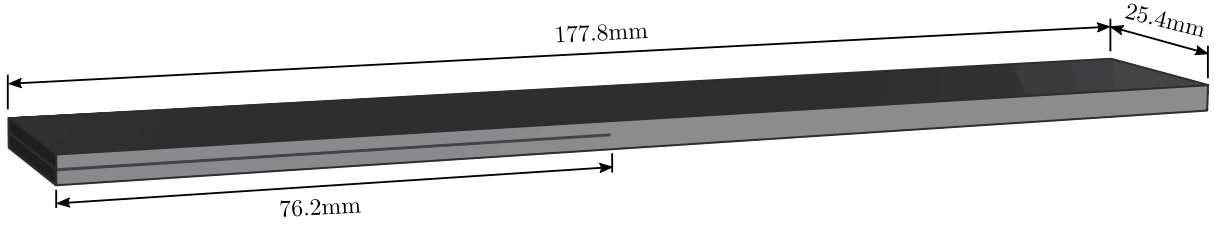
Detailed drawing/plan of ENF specimen (with pre-crack)
